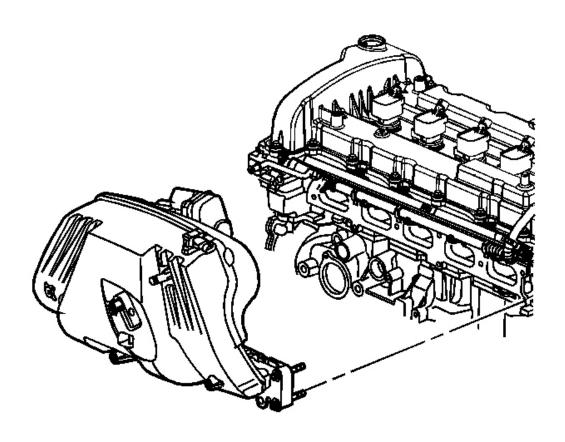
Identifying Intake Manifold And Bolts Courtesy of GENERAL MOTORS CORP.
